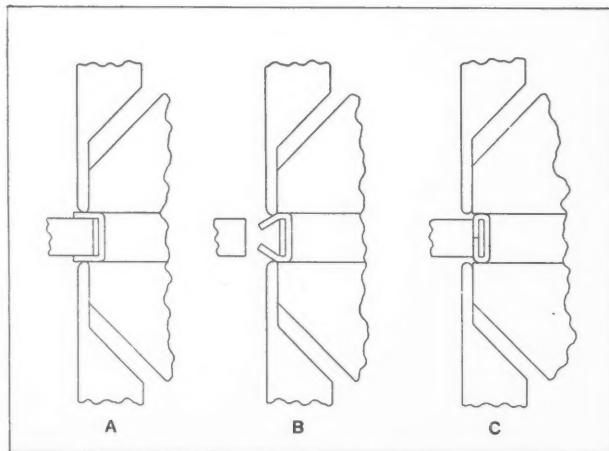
Three Stages in Bending Required to Form the Butt of the Knitting Machine Needle Shown in Fig. 1
